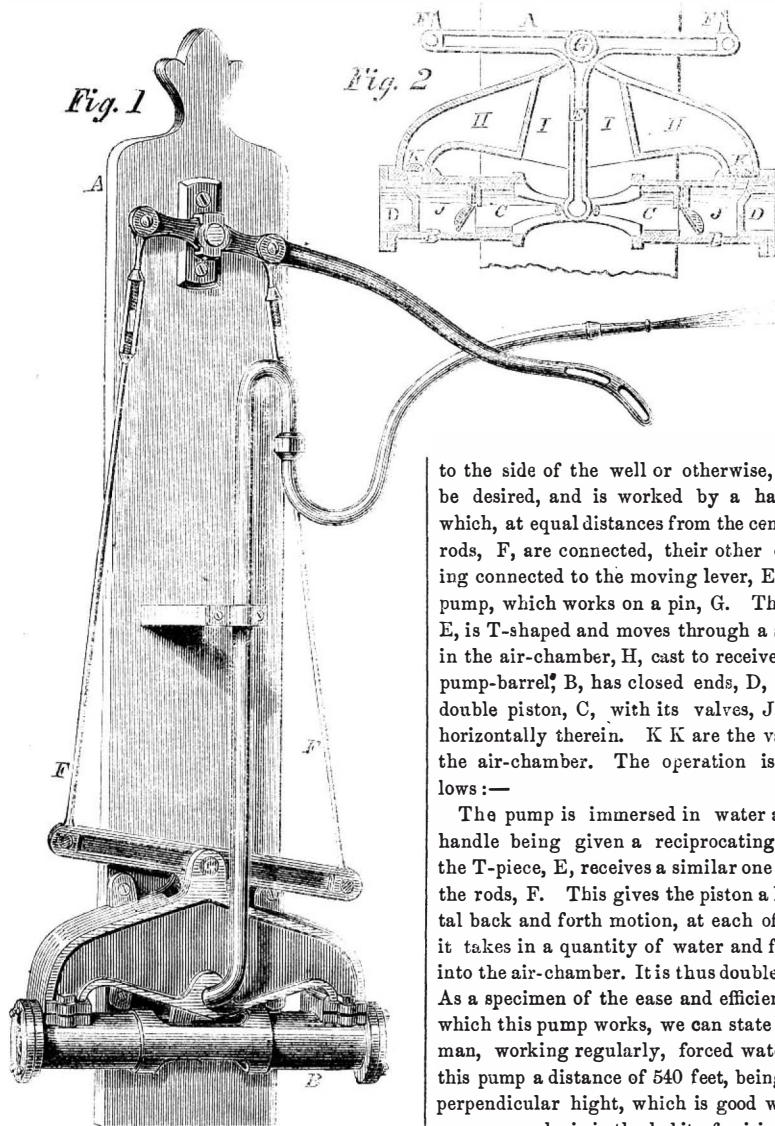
is a perspective view and Fig. 2 a section of the working parts, which we will now proceed to explain.
